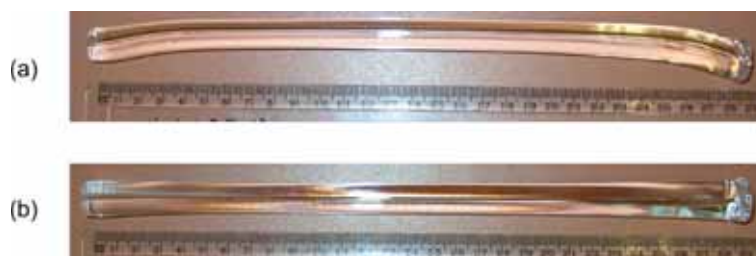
Examples of extruded wedged jacket preforms where the guiding pole has been used. Side view (a) and top view (b).
